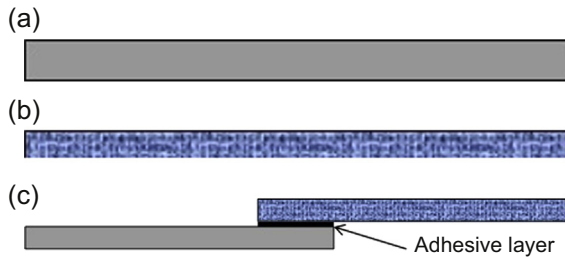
Procedure for adhesive bonding technique: (a) construct the first part, (b) construct the second part, (c) apply adhesive to bond two parts.
